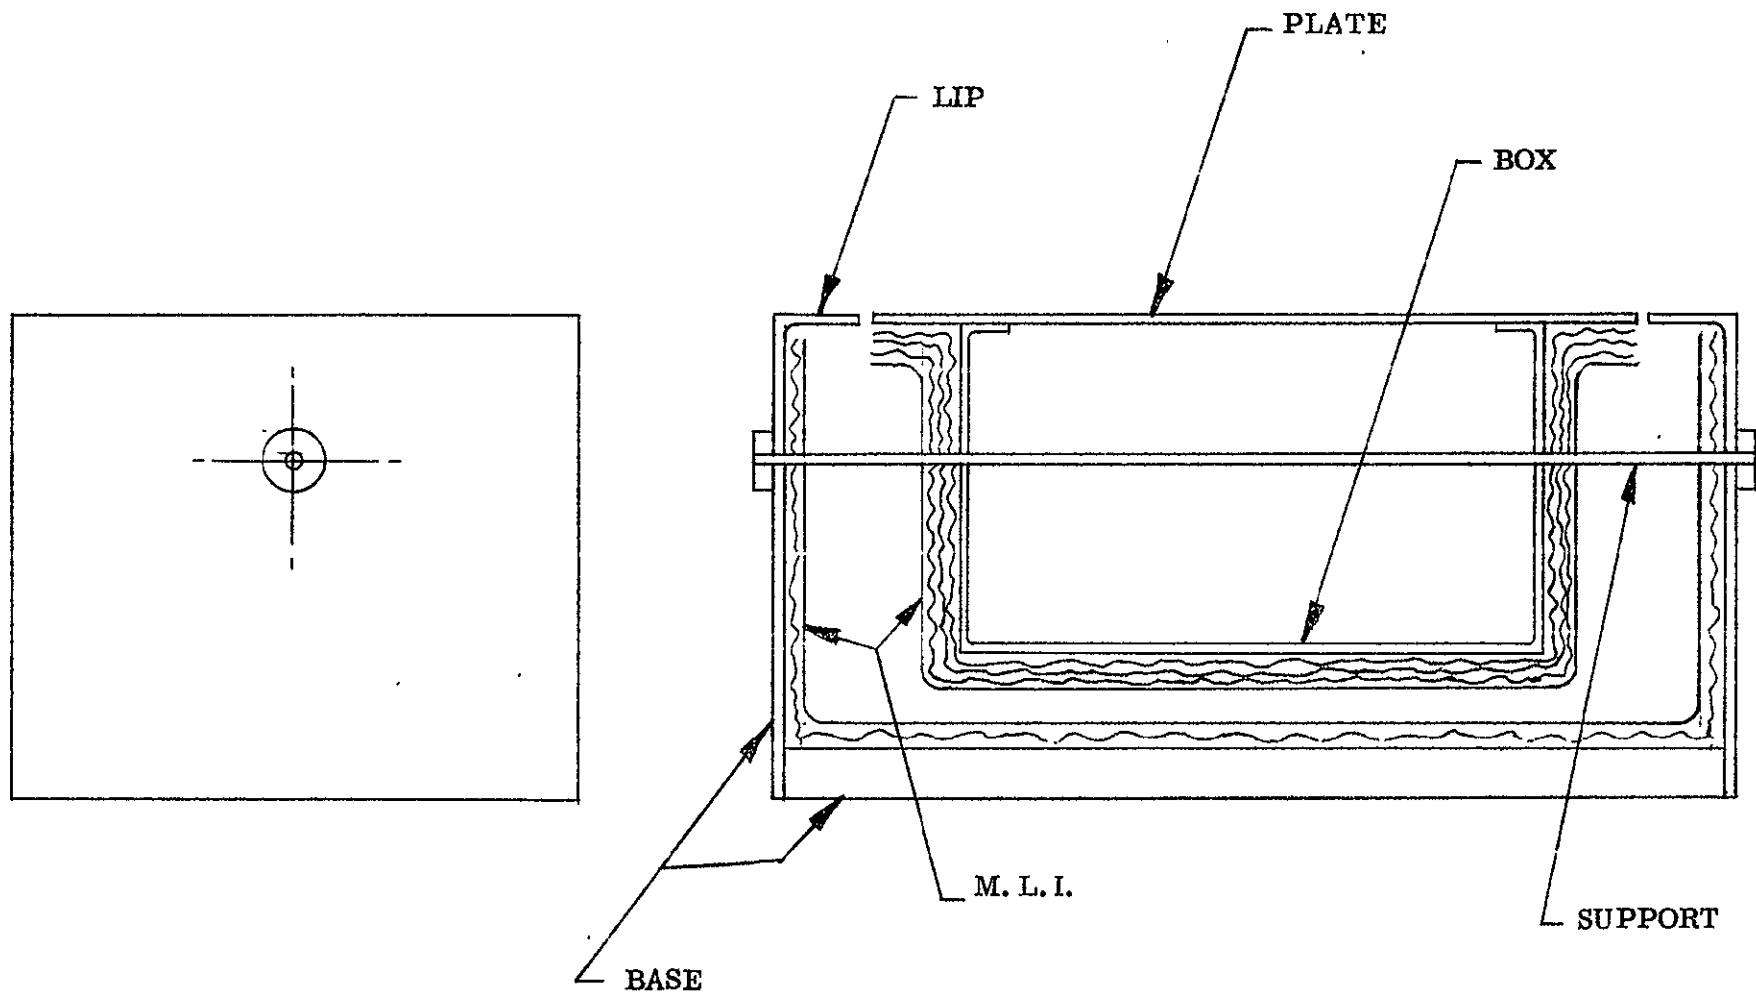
Multilayer Insulation Test Fixture Modification 1
